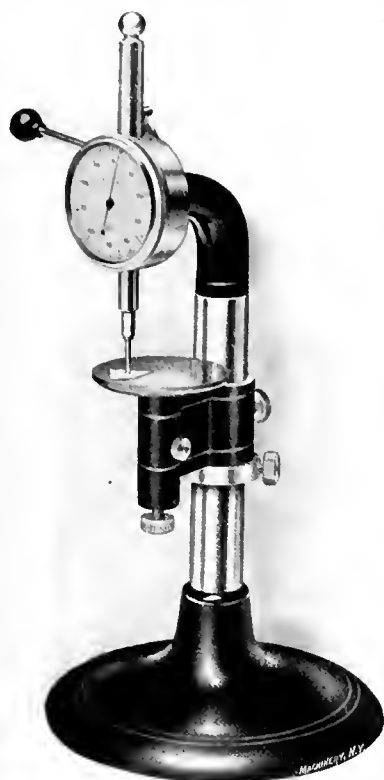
Upright Dial Gage of the Rack and Pinion Type.
